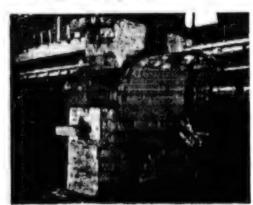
Nickel-Base Superalloy for Helium Vessel in Hollow-Forging Process
